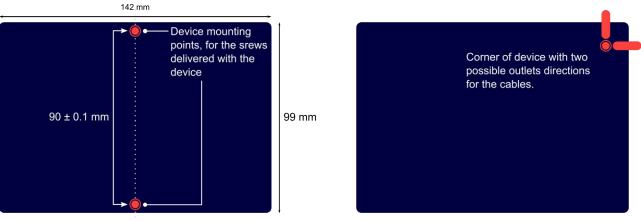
Schematic device top view showing the mounting points and cable outlet options
